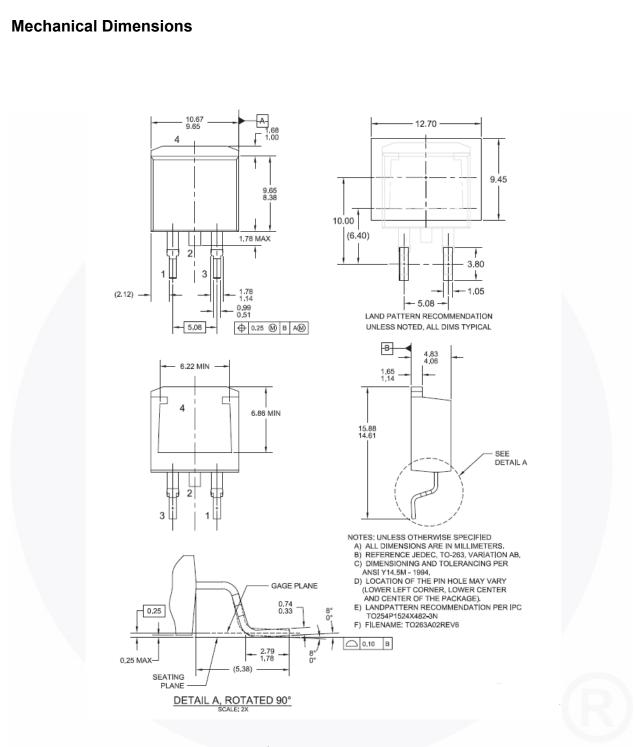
TO263 (D²PAK), Molded, 2-Lead, Surface Mount
